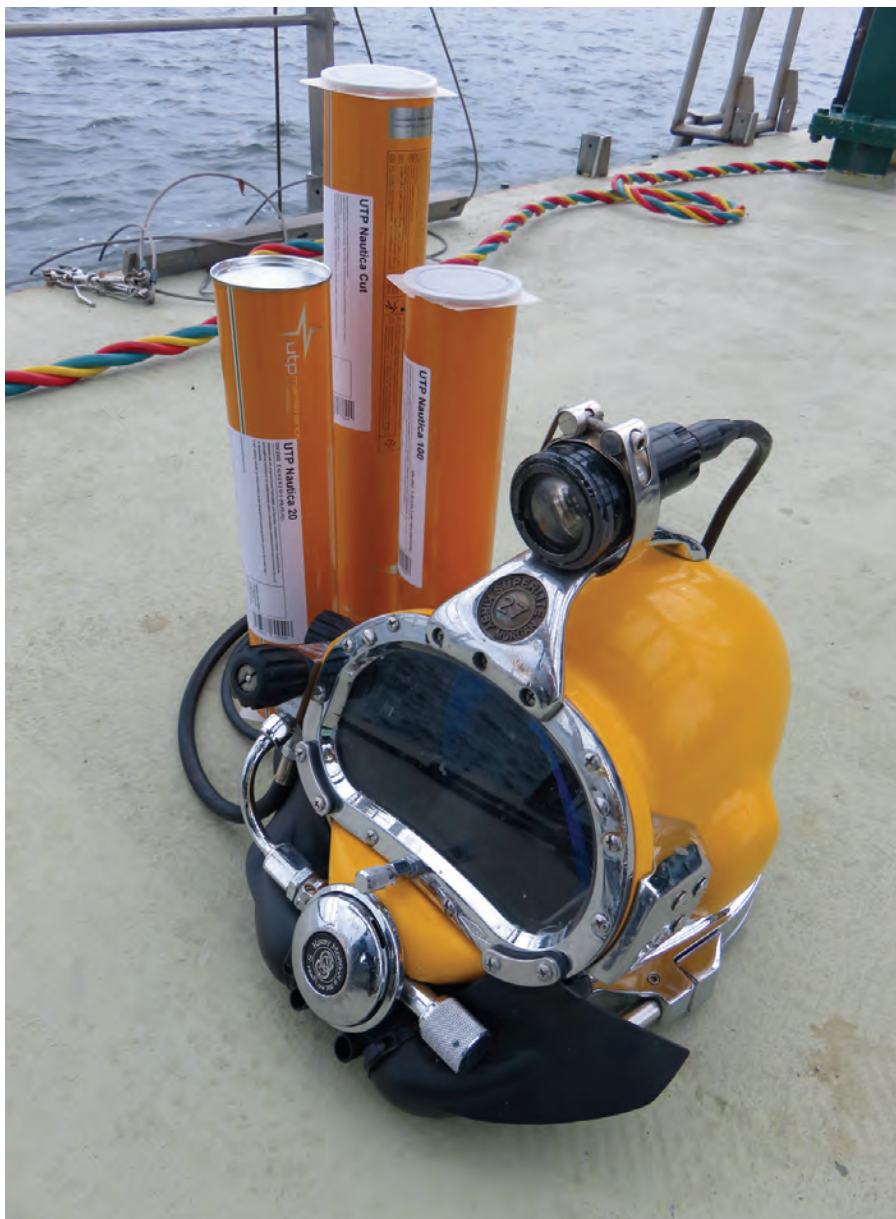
Essentials for the dive: electrodes in hermetically sealed metal cans to protect the electrodes before the welding operation, and a Kirby Morgan diving helmet. (Courtesy of Jan Hilkes.)
